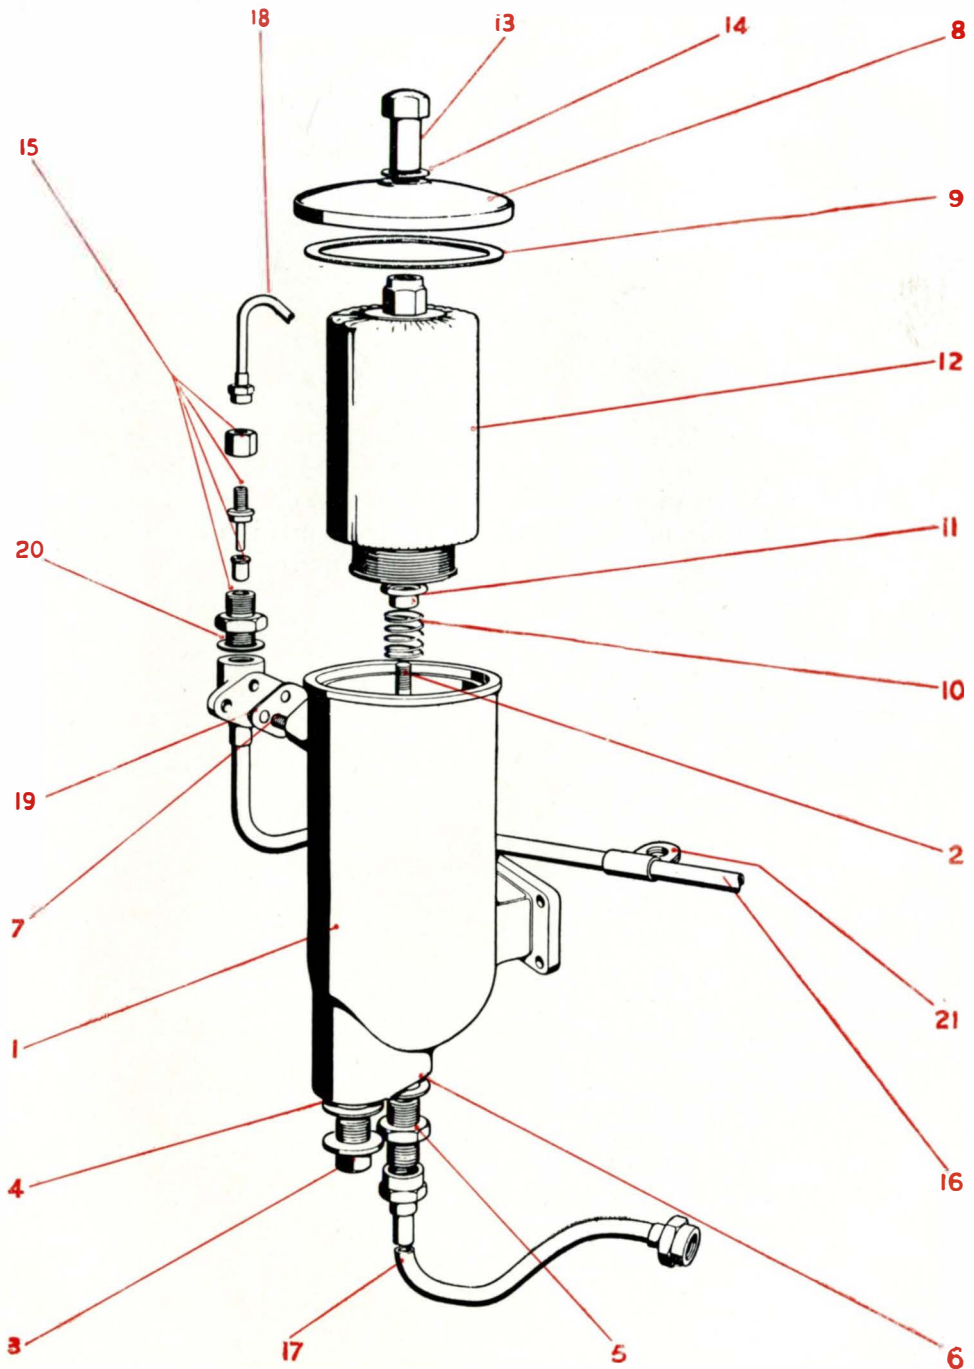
EXPLODED VIEW OF THE FUEL FILTER
